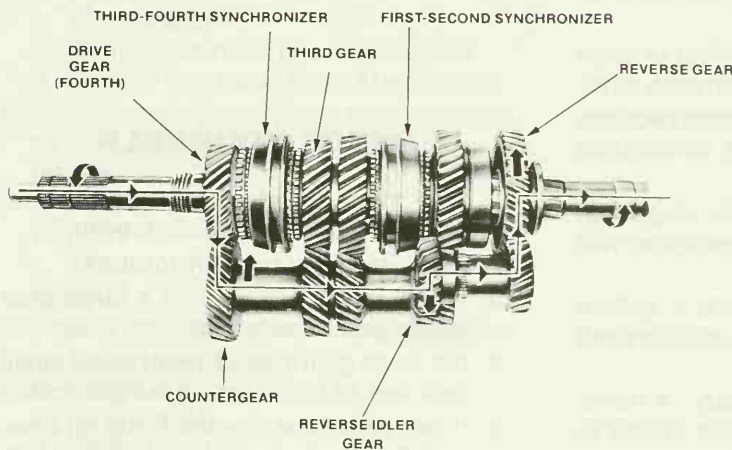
Power flow through a four-speed transmission in reverse gear. (Chevrolet Motor Division of General Motors Corporation)
